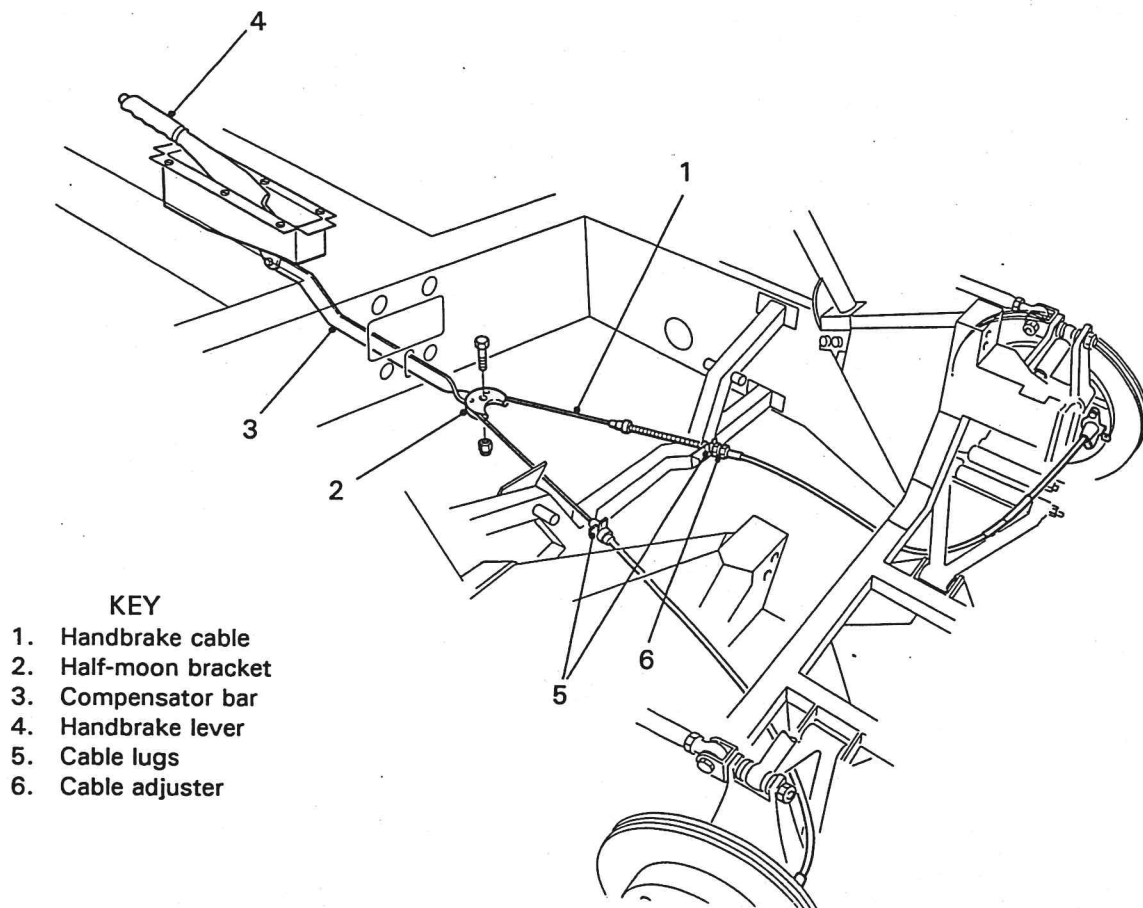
Handbrake Lever, Compensator Bar and Cable Assembly
